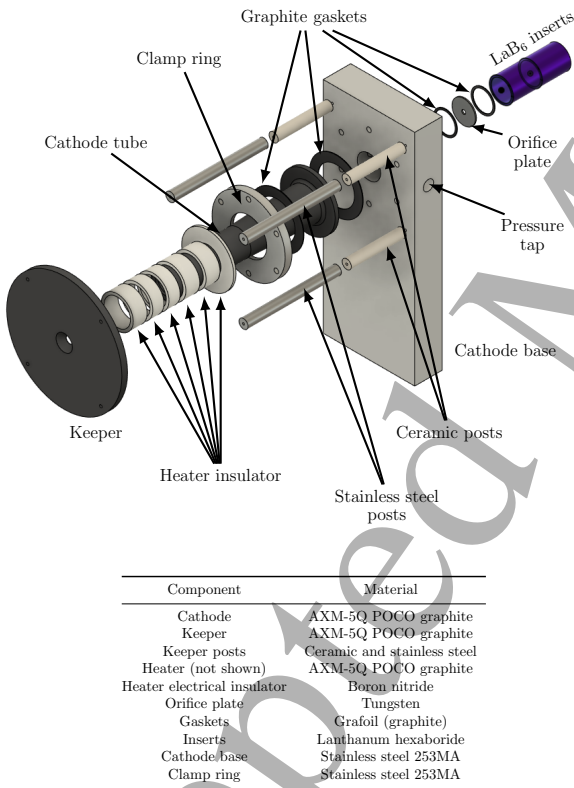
Exploded view of the cathode assembly without heater, fasteners, and heat shields. Reproduced from “Pierre-Yves C. R. Taunay, *Scaling Laws in Orificed Thermionic Hollow Cathodes*, Ph.D. dissertation, Princeton University, 2020.” [23] Copyright 2020, Pierre-Yves C. R. Taunay.
